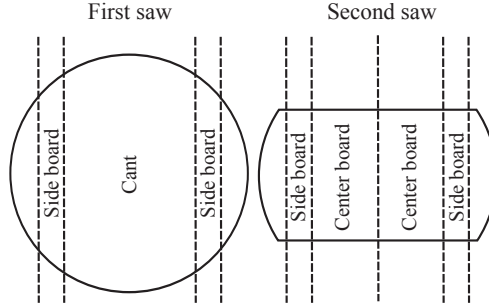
Cant sawing. The first sawing machine cuts the log into side boards and a cant. The cant is then rotated by 90 degrees and cut by the second sawing machine into side boards and center boards. Side boards are further processed by edging and trimming, while trimming is the only operation on center boards.
